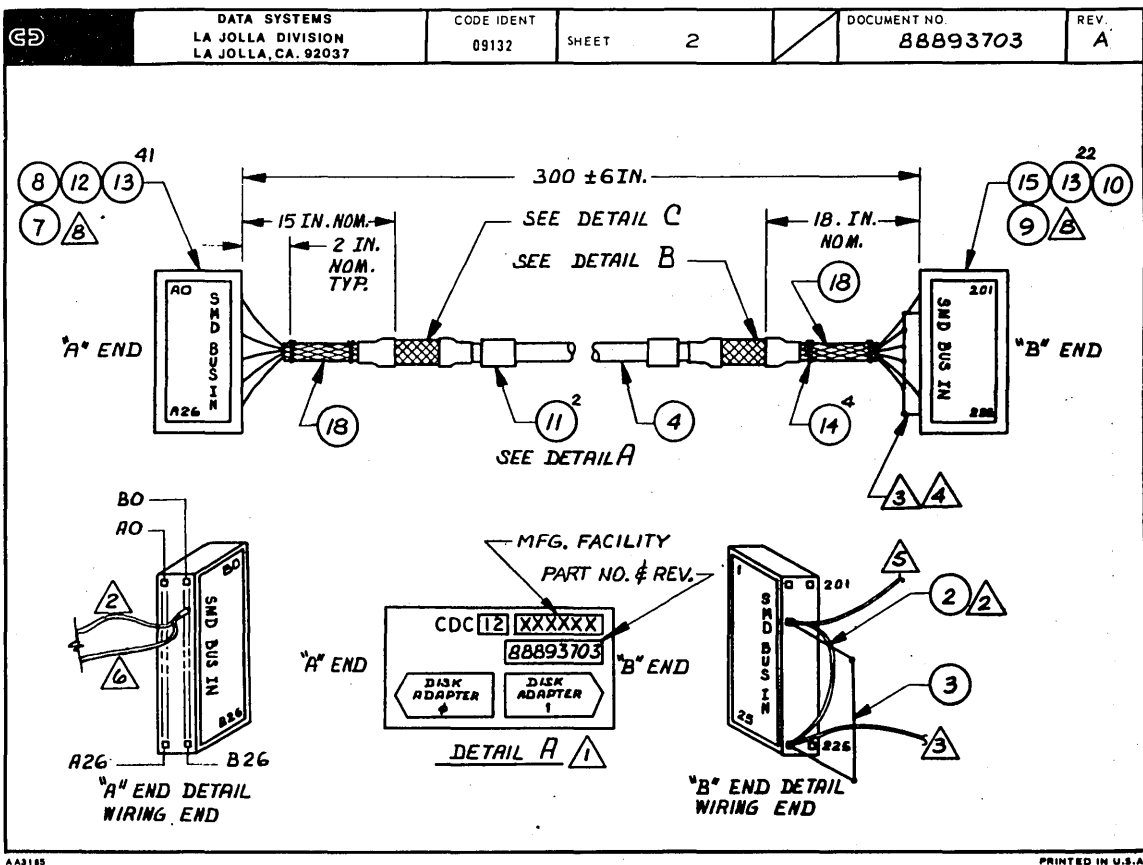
Cable Assembly - Bus In Expansion (Sheet 1 of 5)
